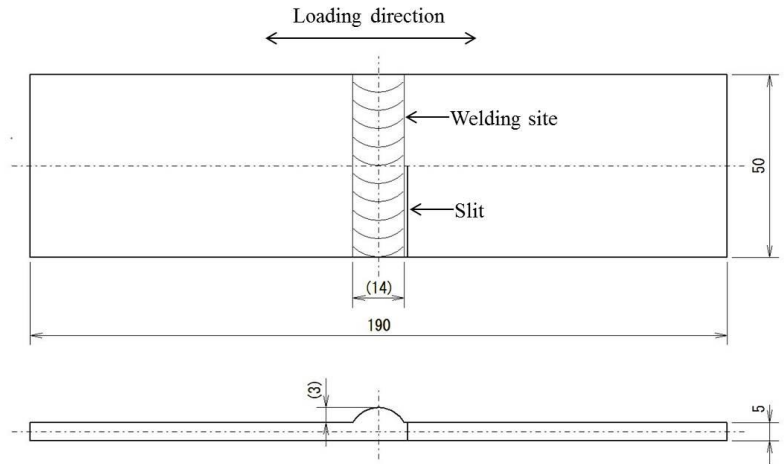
Geometry of welded specimen with crack on one side.
